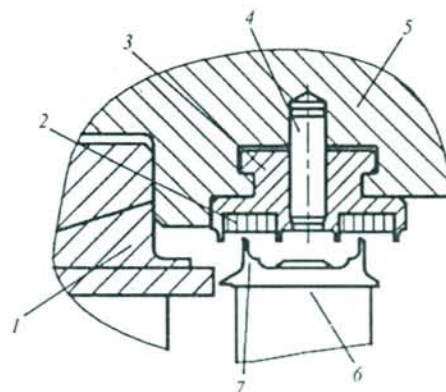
Configuration of honeycomb shroud seals used in the yokes and inner cylinder: 1, diaphragm; 2, honeycomb unit; 3, honeycomb insert; 4, dowel; 5, yoke; 6, working blade; 7, rotor lug.
